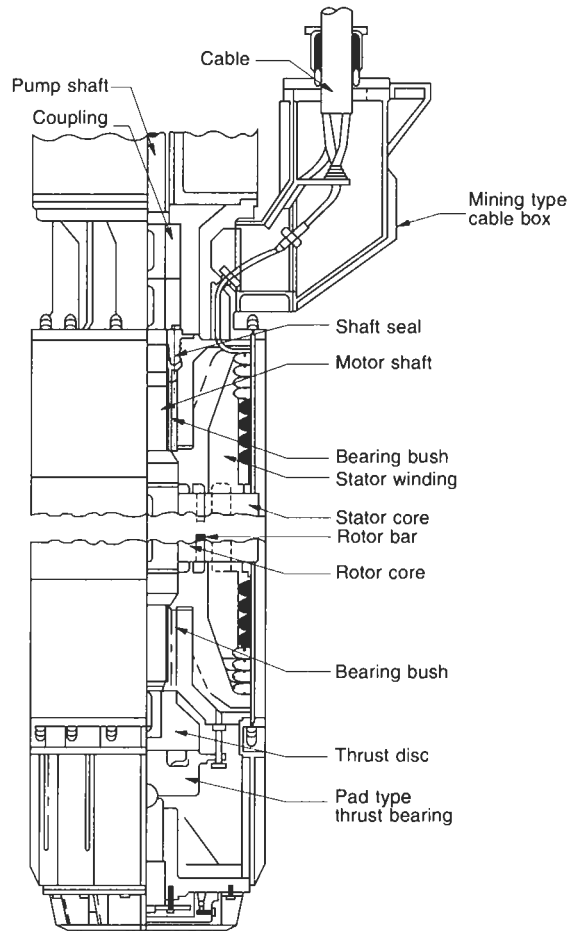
Sectional arrangement of a submersible squirrel cage motor of 860 kW, 3 ϕ , 50 Hz, 3.3 kV, 1470 r.p.m. (Weir pumps)
